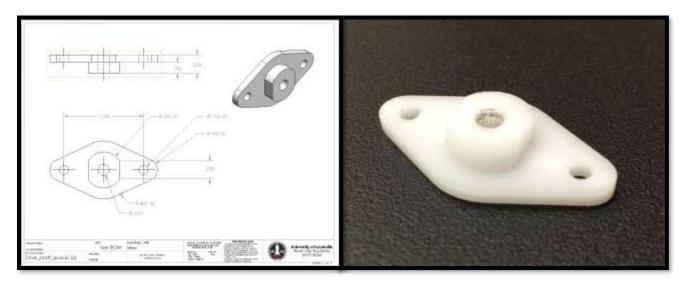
Drive shaft spacer drawing and machined drive shaft spacer.
